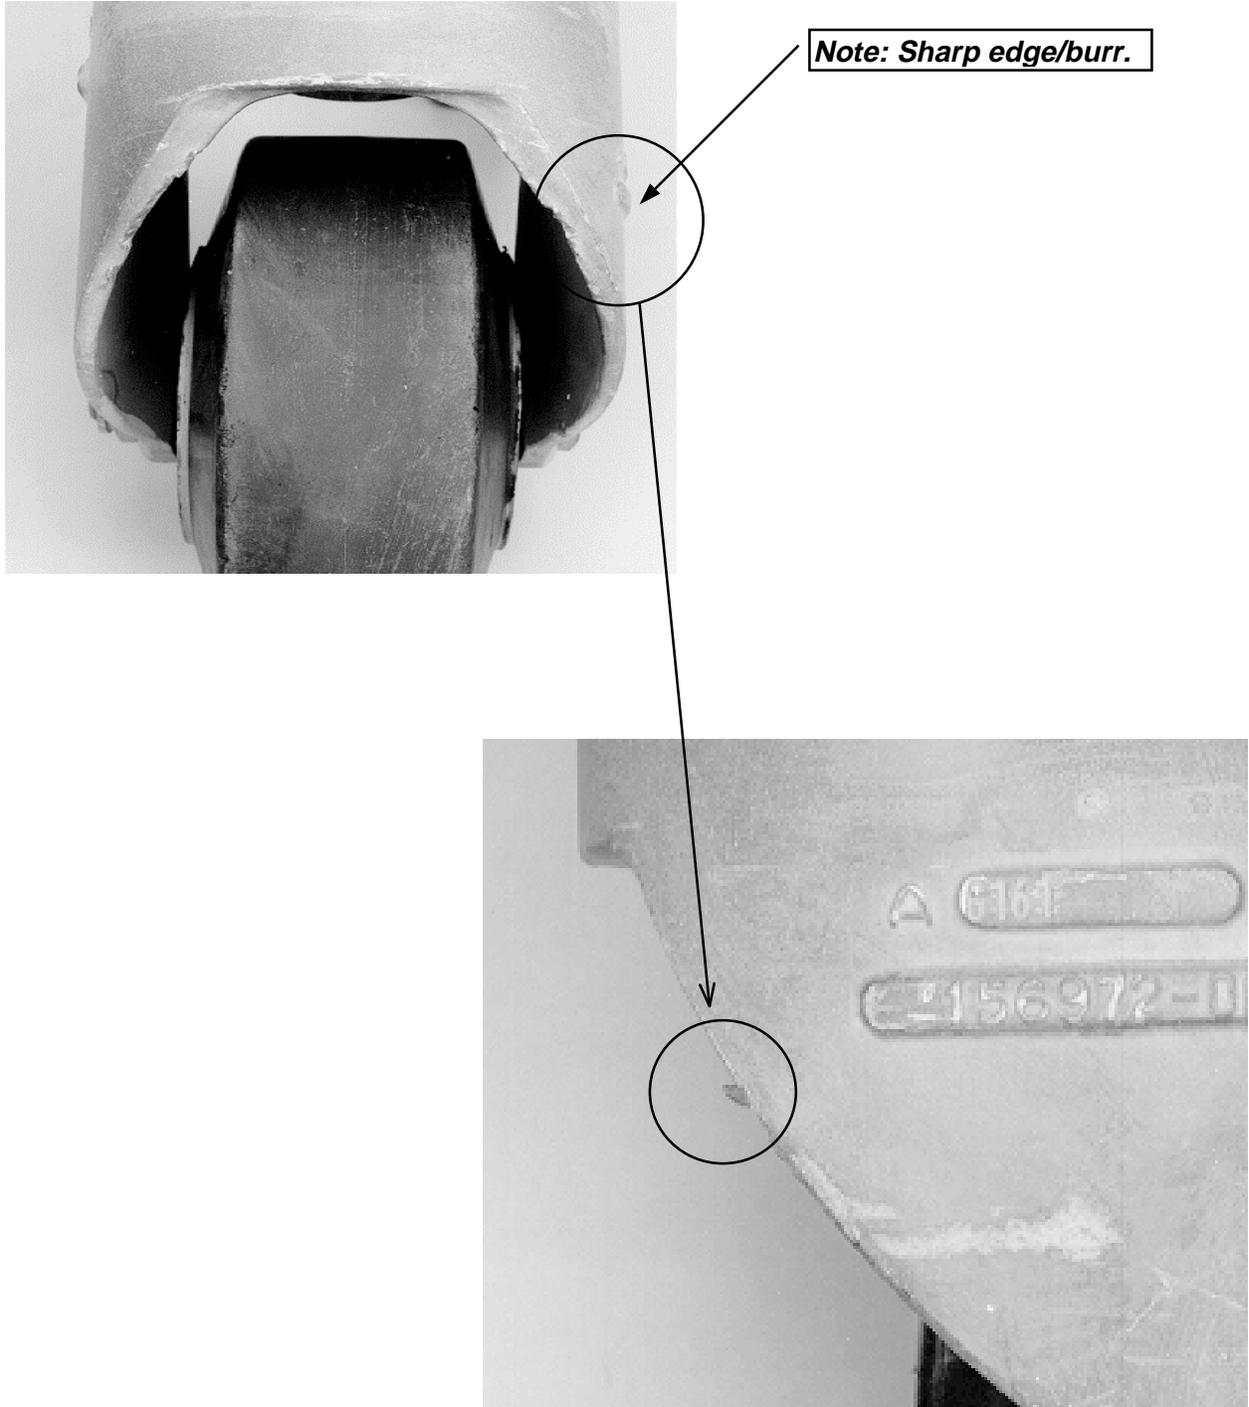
Typical damage to barrel-type caster from casting tool.
